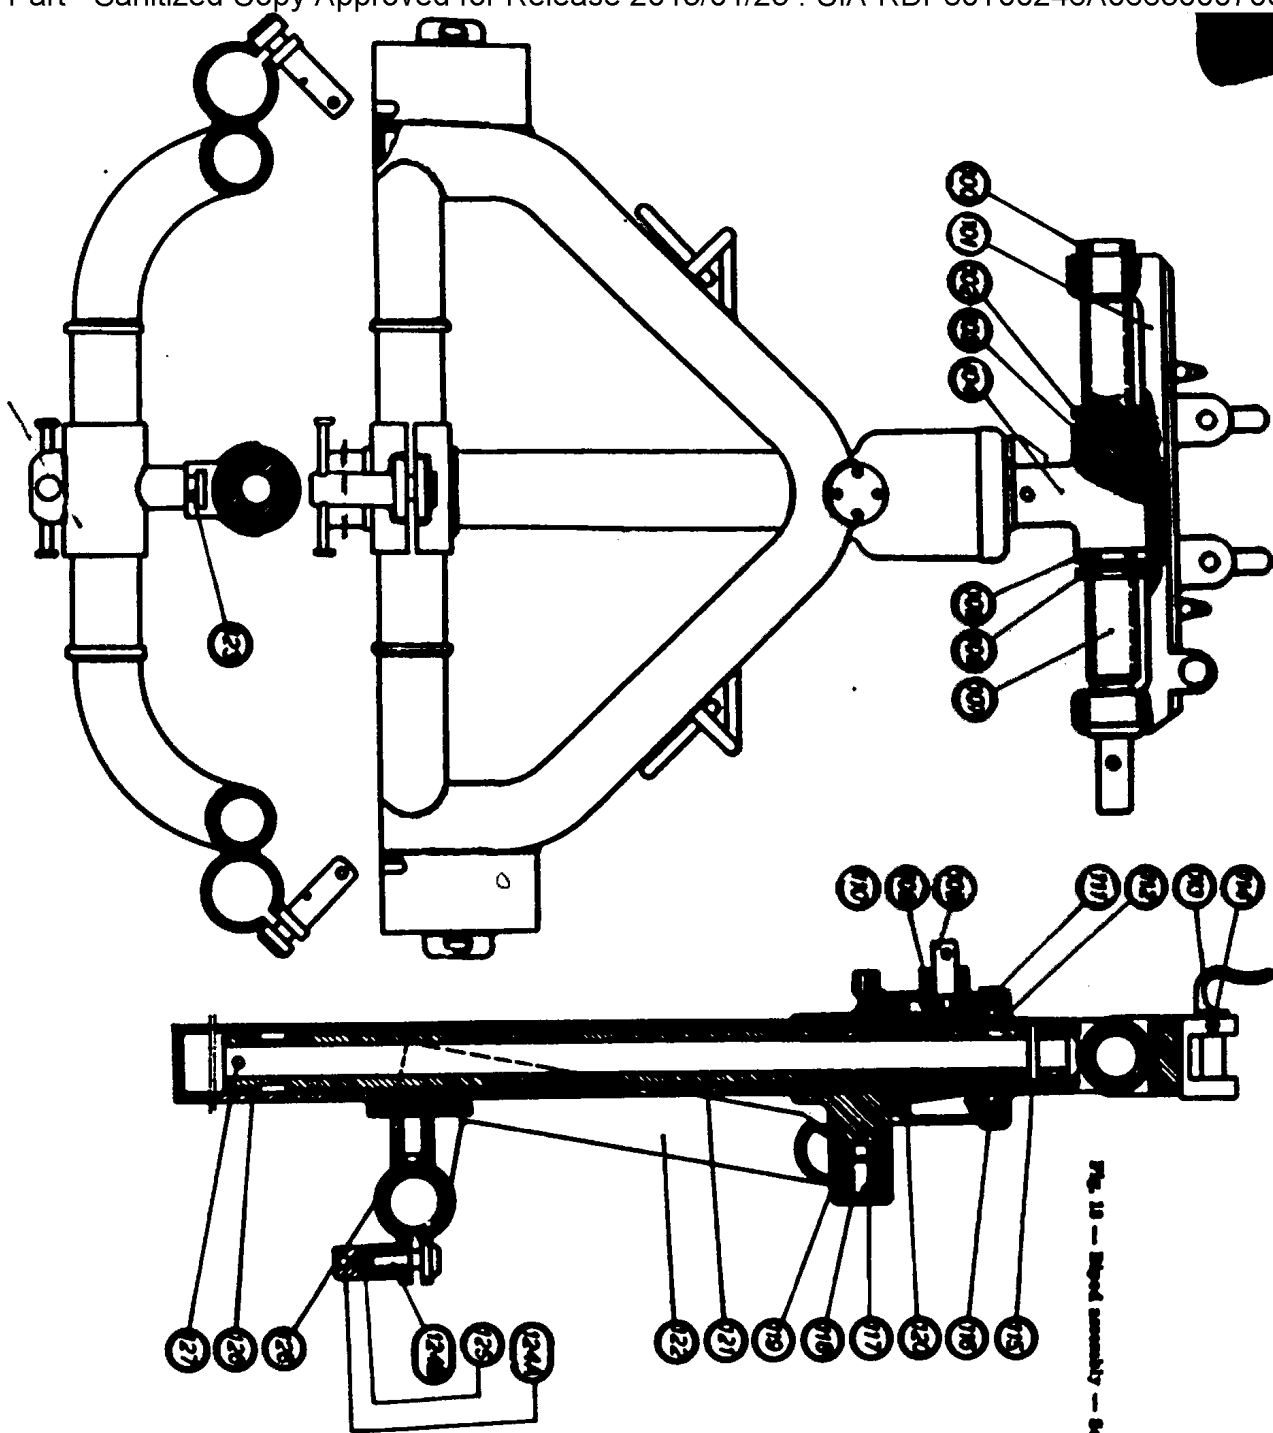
Bipod assembly - System disassembly of parts of the next page)
